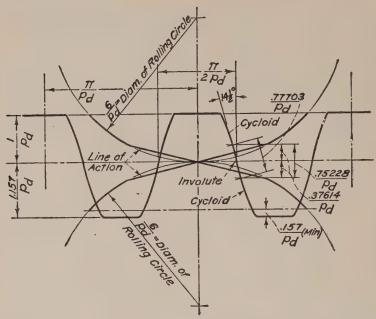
Basic Rack Outline of $14\frac{1}{2}$ Deg. Composite System, Involute Gear-Tooth Form.
